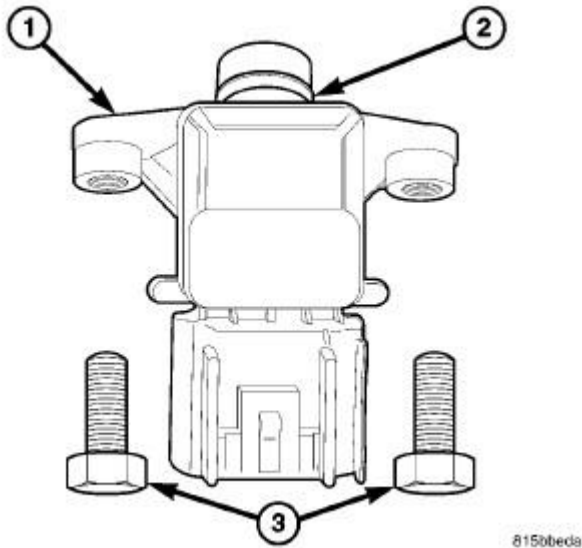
MAP Sensor Mounting Bolts And O-Ring
